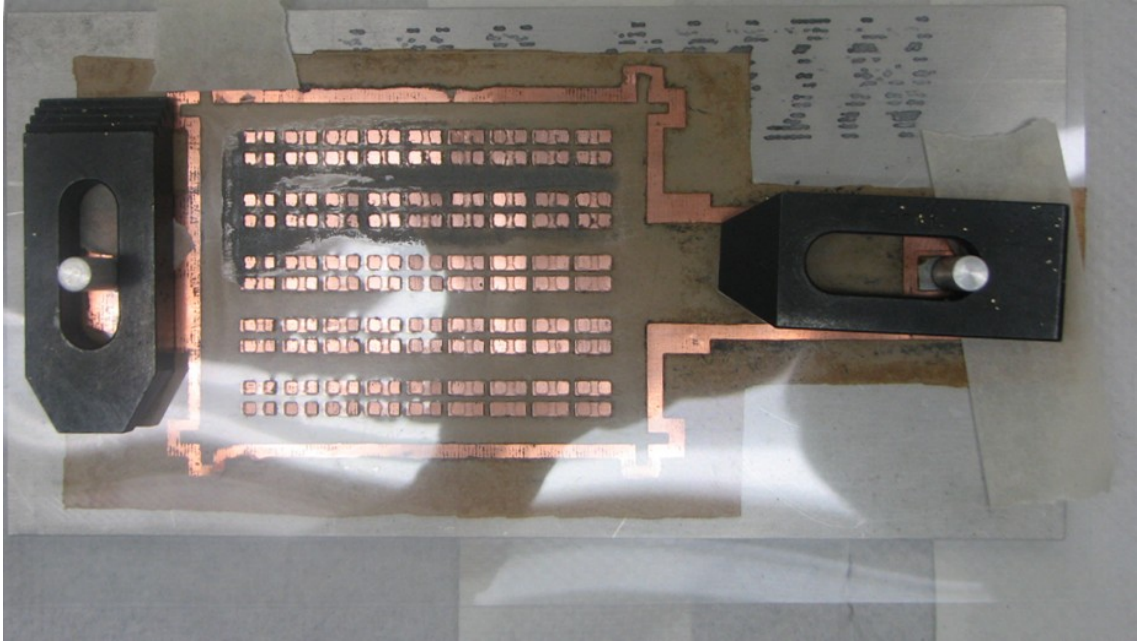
Solder stencil on top of the top circuit board prior to solder paste application
